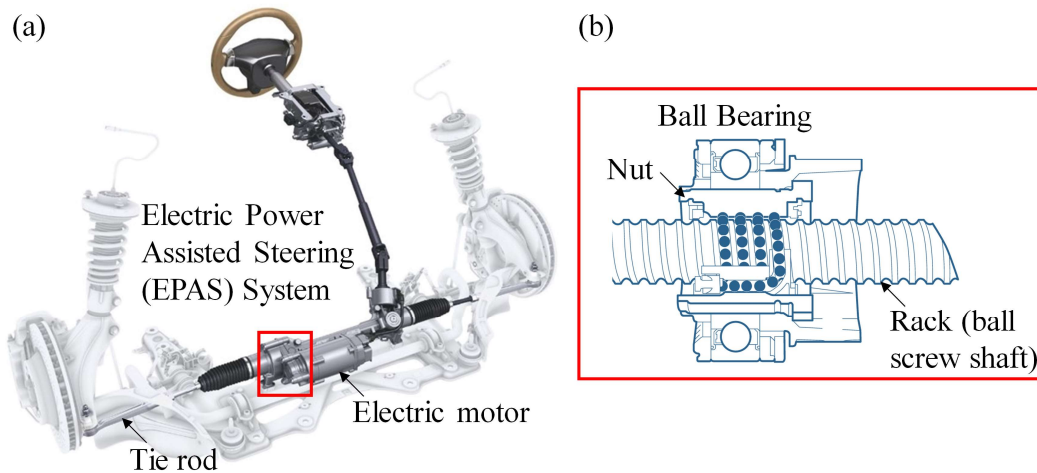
(a) Rack EPAS system [photo courtesy of Porsche]; (b) key mechanical components: ball bearing and ball screw [photo courtesy of Bosch]
